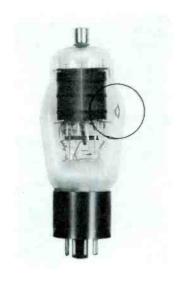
A 6CD6G Tube with a Hole in Envelope.
